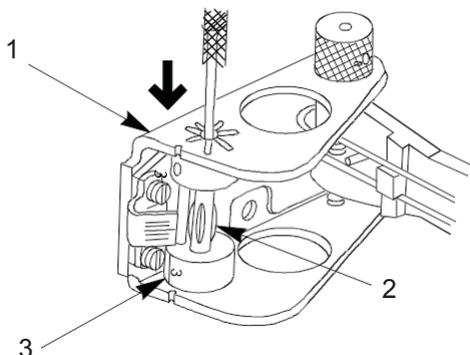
Rear Sight Base, Elevator Assembly, Shaft on Flat Surface.
